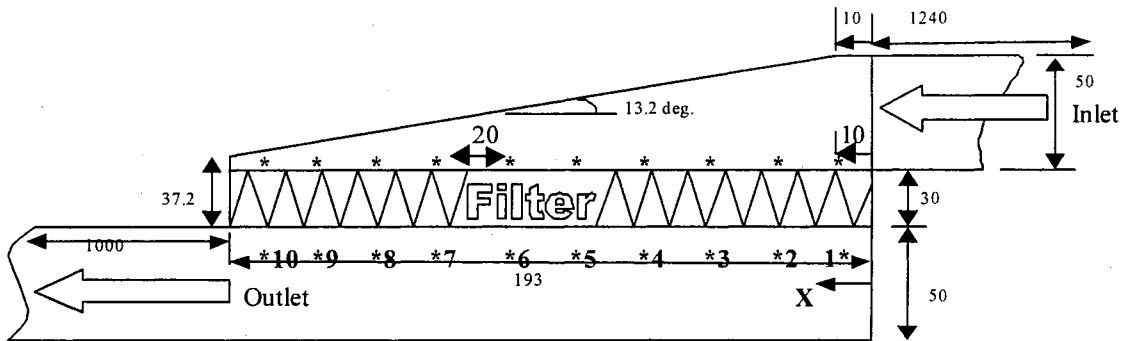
Detail dimensions of the optimized model (dimensions in mm)
